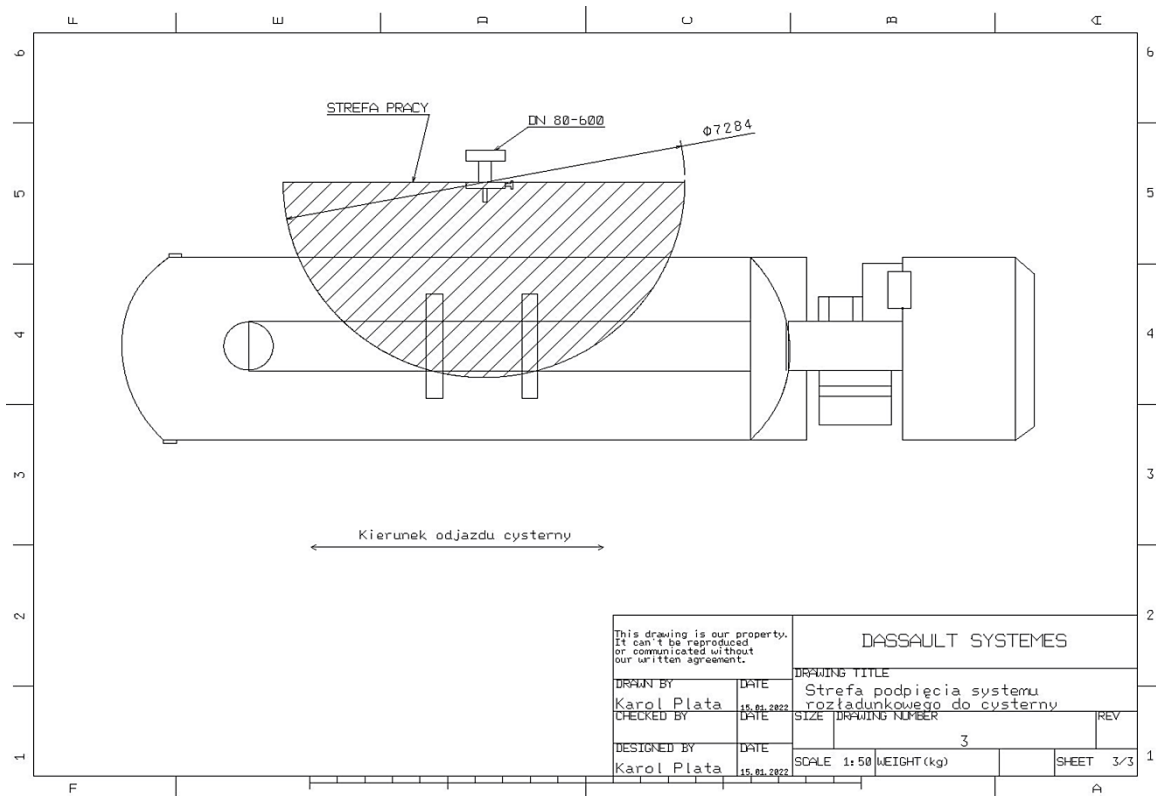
Technical drawing of the connection of the unloading system to the tanker
